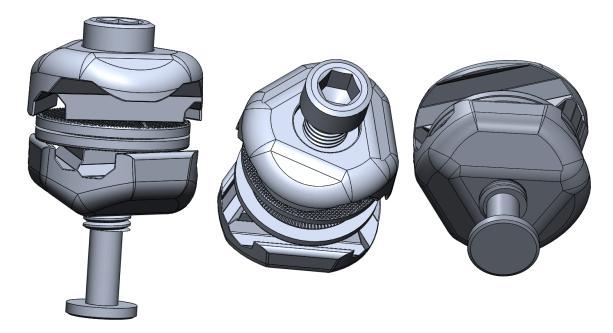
Final clamp concept; a) Isometric view, b) Top view, c) Bottom view
